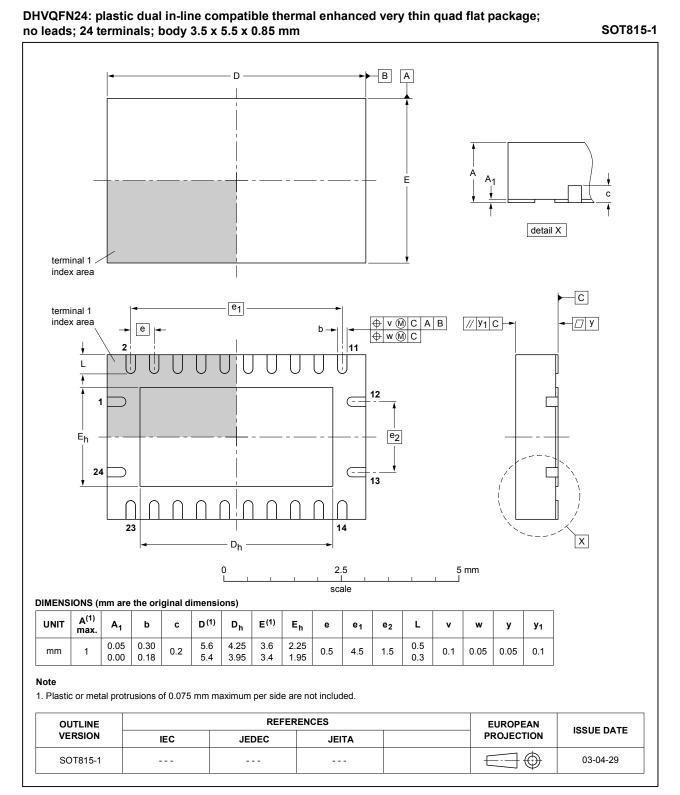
Package outline SOT815-1 (DHVQFN24)
